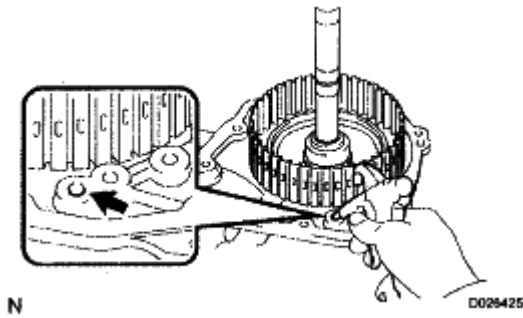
Removing Overdrive Direct Clutch Drum Sub-Assembly
